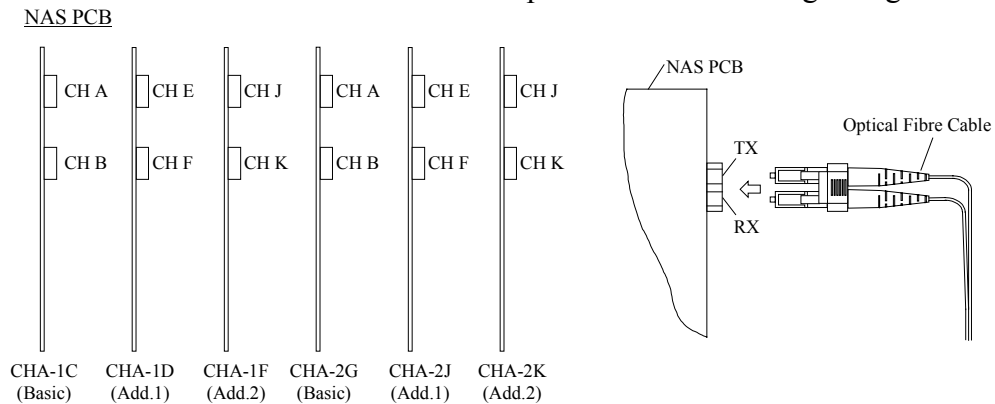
Connection of Optical Fiber Cable
